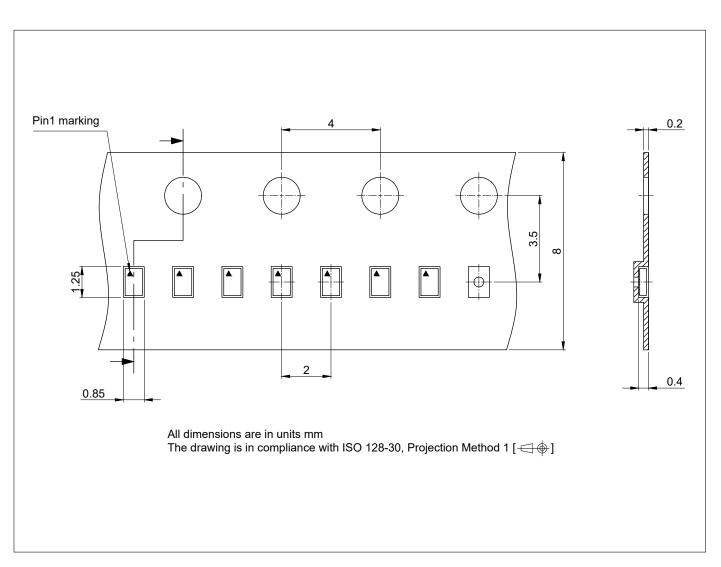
TSLP-6-4 Carrier Tape Drawing (Top and Side Views)
